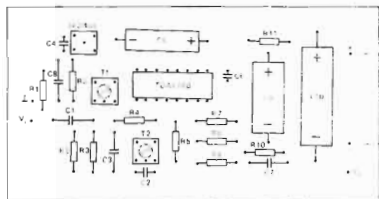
Component side of printed circuit board (test circuit Fig. 3).
